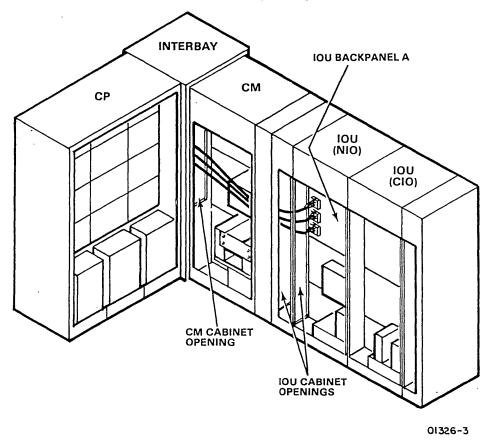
CP-0 Cables to IOU Backpanel A Cable Connections
